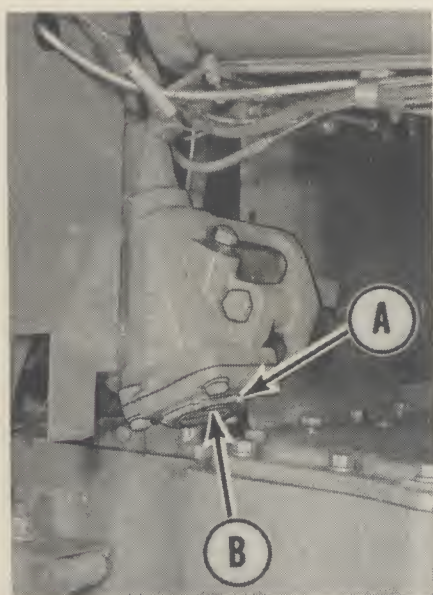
End play of steering gear worm-shaft is controlled by the threaded adjusting plug (B) and lock nut (A). Both of these parts are also shown in left view in Fig. 0450.
